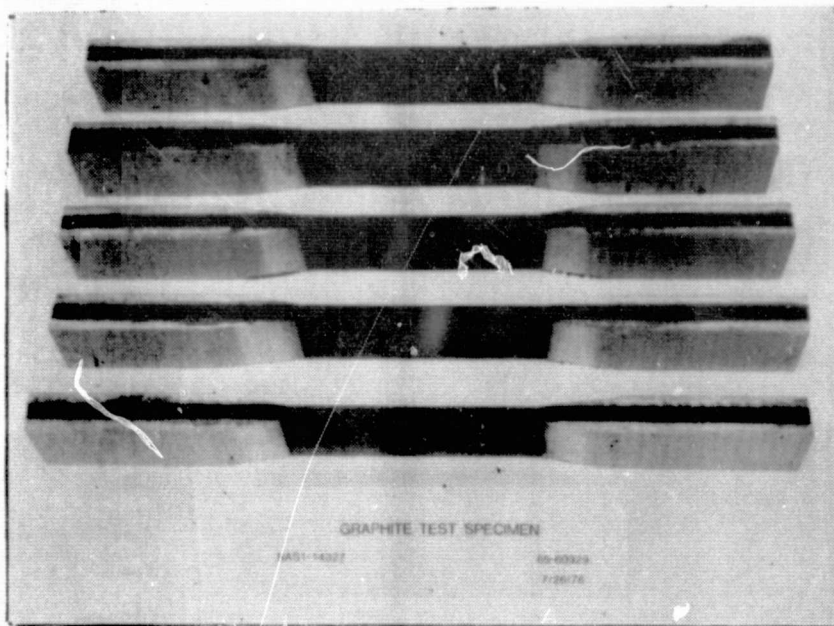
Basic Material Graphite Test Specimen, Drawing 69-60929
